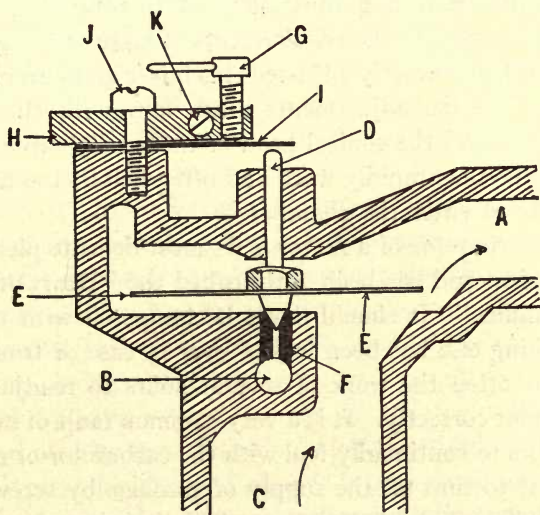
Mechanical Mixing Valve (Cadillac)
